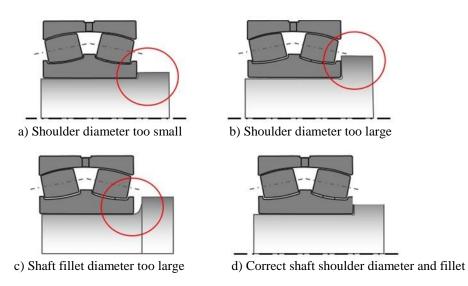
CORRECT SHAFT SHOULDER DIAMETER AND FILLET
